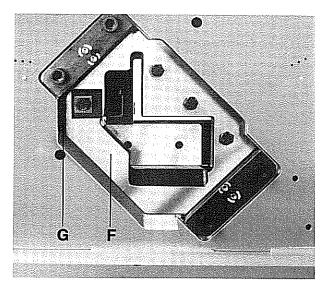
PMG section blade, seer from cover plate side (KBLH 500, 700 and 1000)
